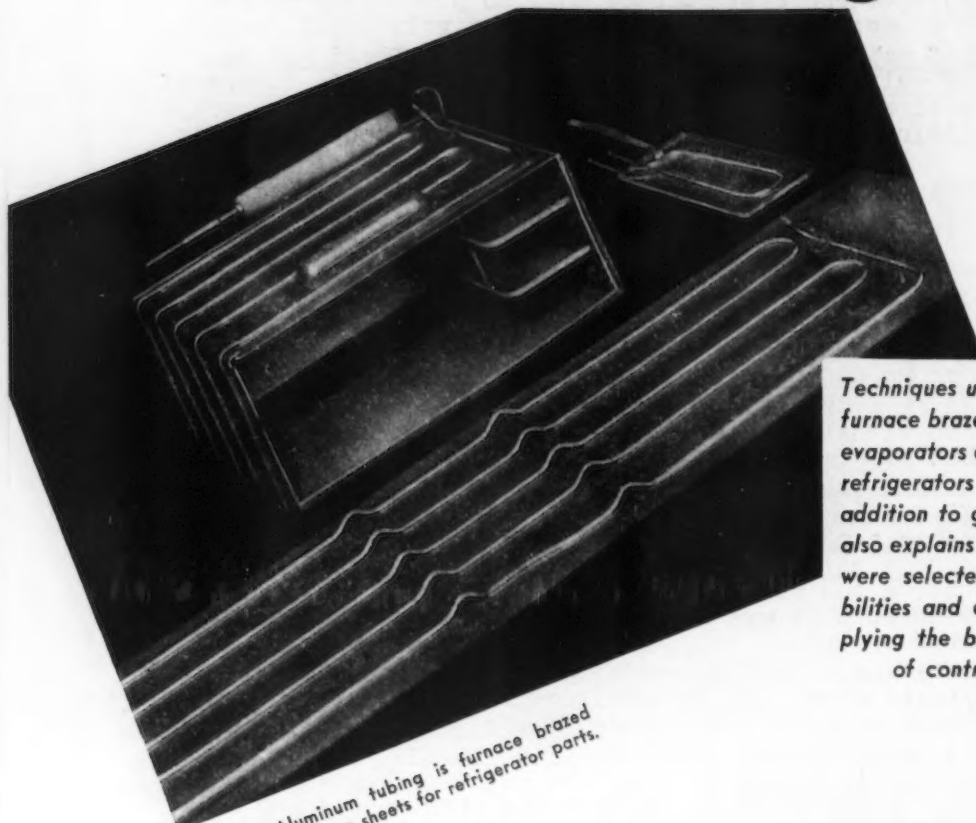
Aluminum tubing is furnace brazed to flat aluminum sheets for refrigerator parts.
